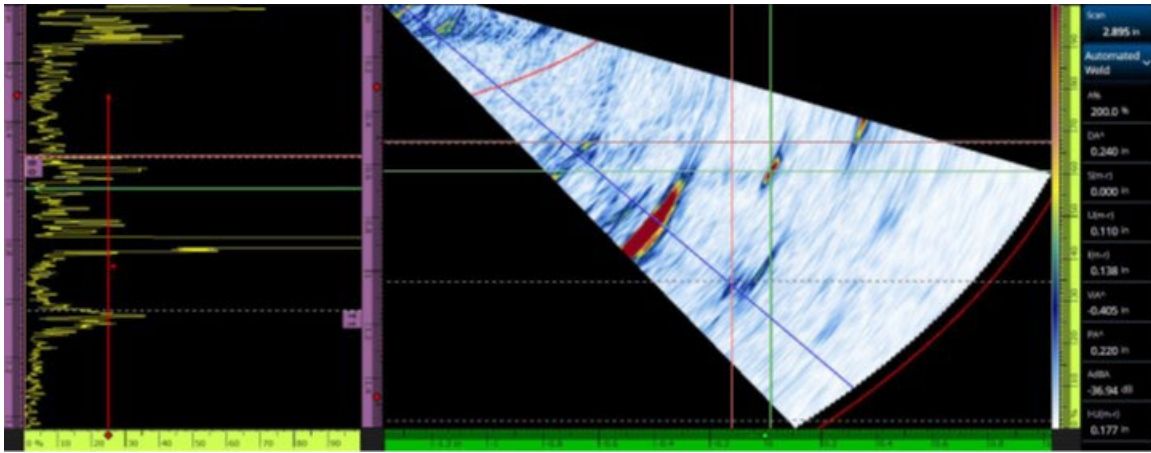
PAUT indication of defect at Location D in fillet weld test panel MGL-10 from Repad-raster scan
